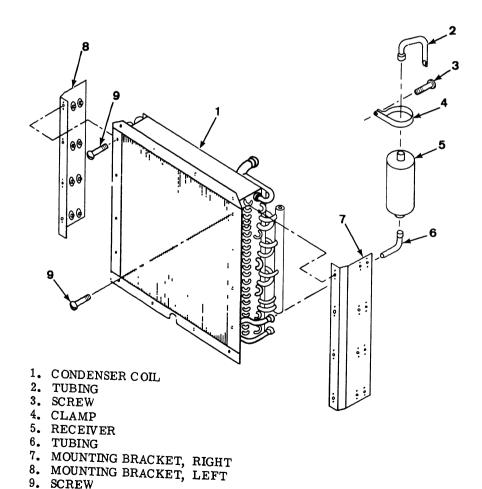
Condenser coil subcooler, receiver, disassembly.
